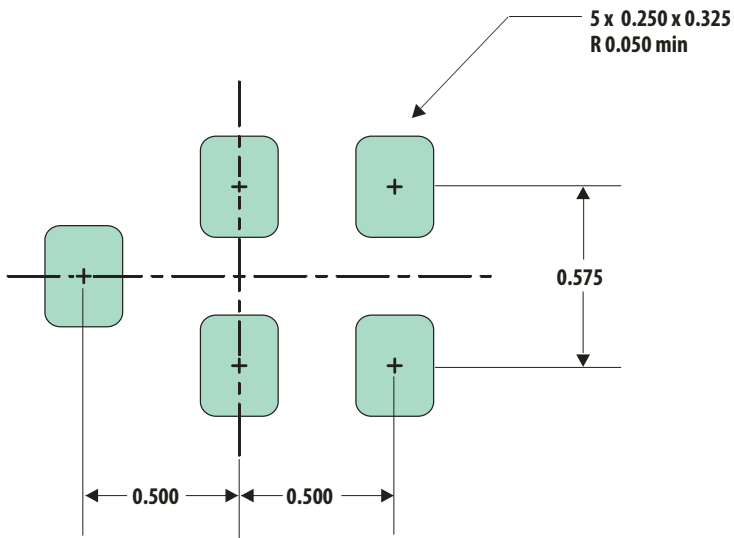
Recommended Solder Stencil (Dimensions in mm)
